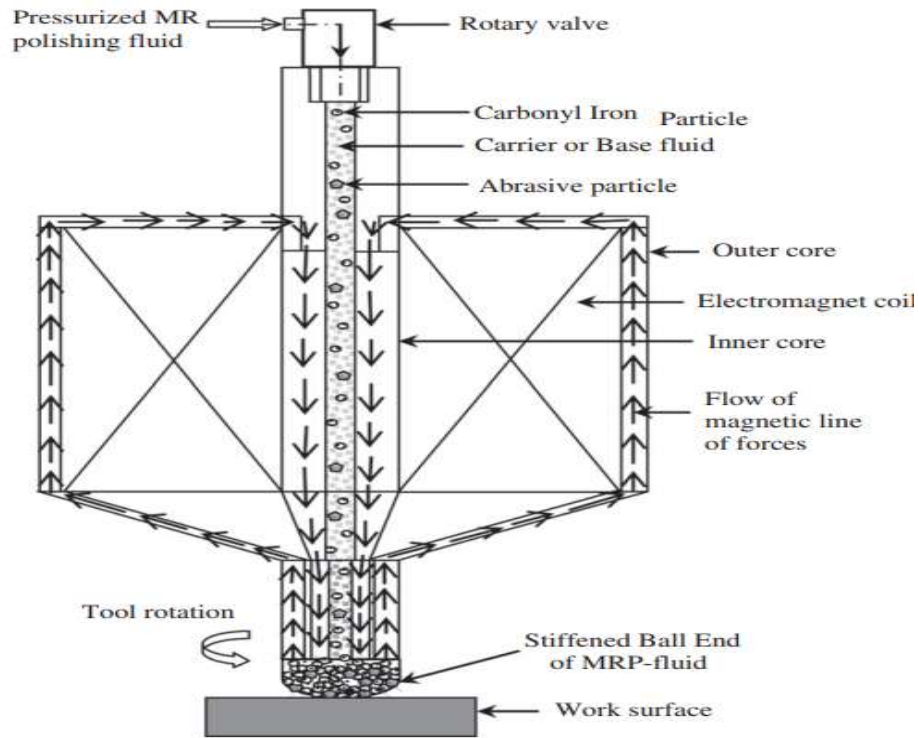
Material removal mechanisms in Ball end magnetorheological finishing process [3]
